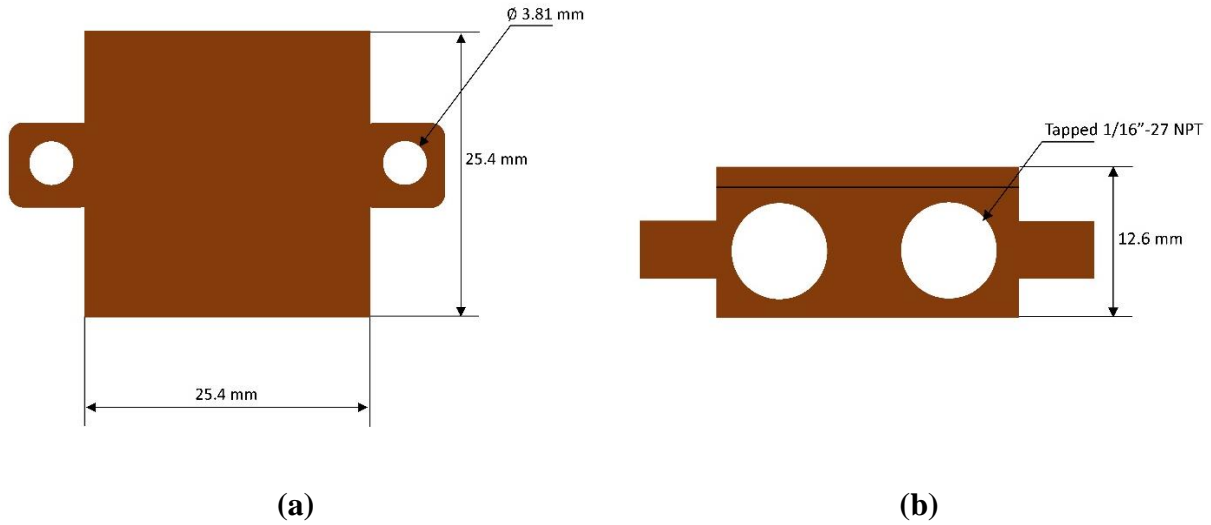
Schematics of evaporator cold plate (a) top view (b) front view.
